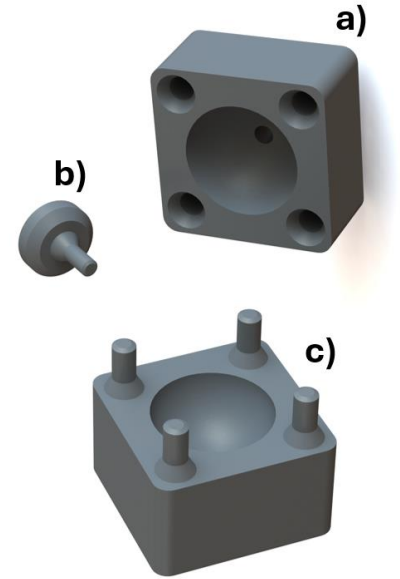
Design of the mold for standardized spherical charges: (a) main mold body with spherical cavity, (b) insert for blasting cap positioning, (c) assembled mold with alignment pins.
